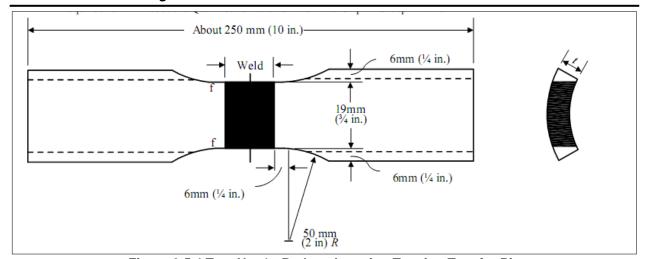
Test No. 1 - Reduced-section Tension Test for Pipe
